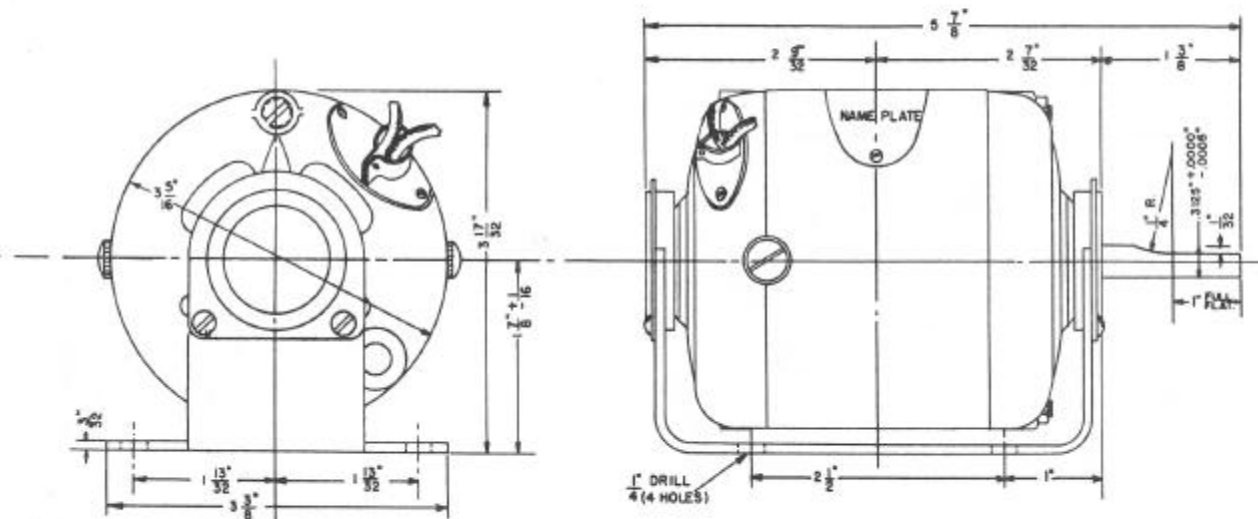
Outline of Blower Motor used in Transmitter Unit
